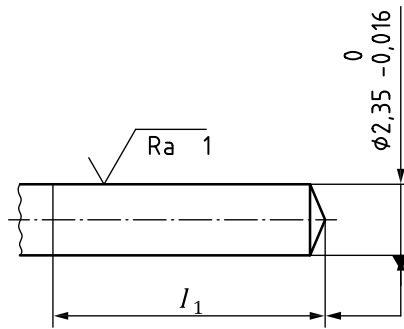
Dimensions, tolerances and surface roughness for Type 2 shank
